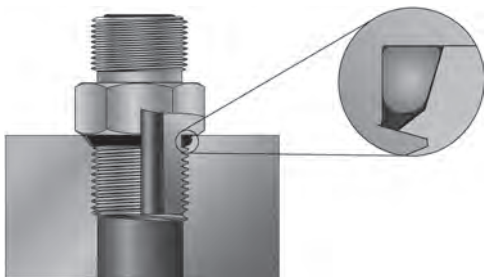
SAE / ISO / JIS B2351 Straight Thread Port O-Ring Upon Assembly
